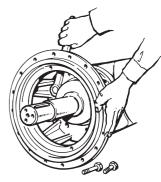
Bearing Assemblies 5F and 6F Six screws secure the lantern to the bearing bracket.
